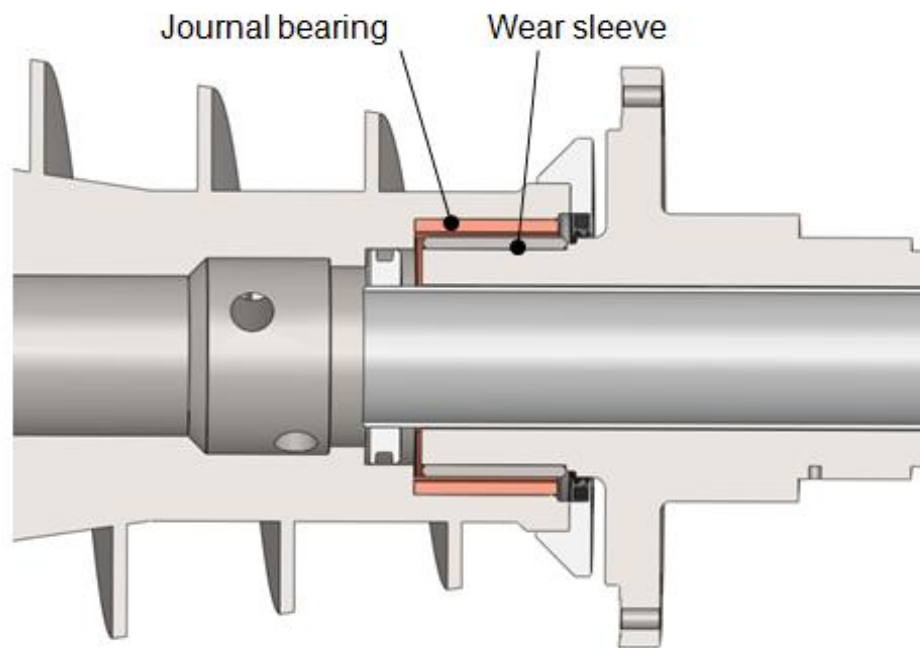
Modifications to conveyor solids end to house a fluid film bearing
